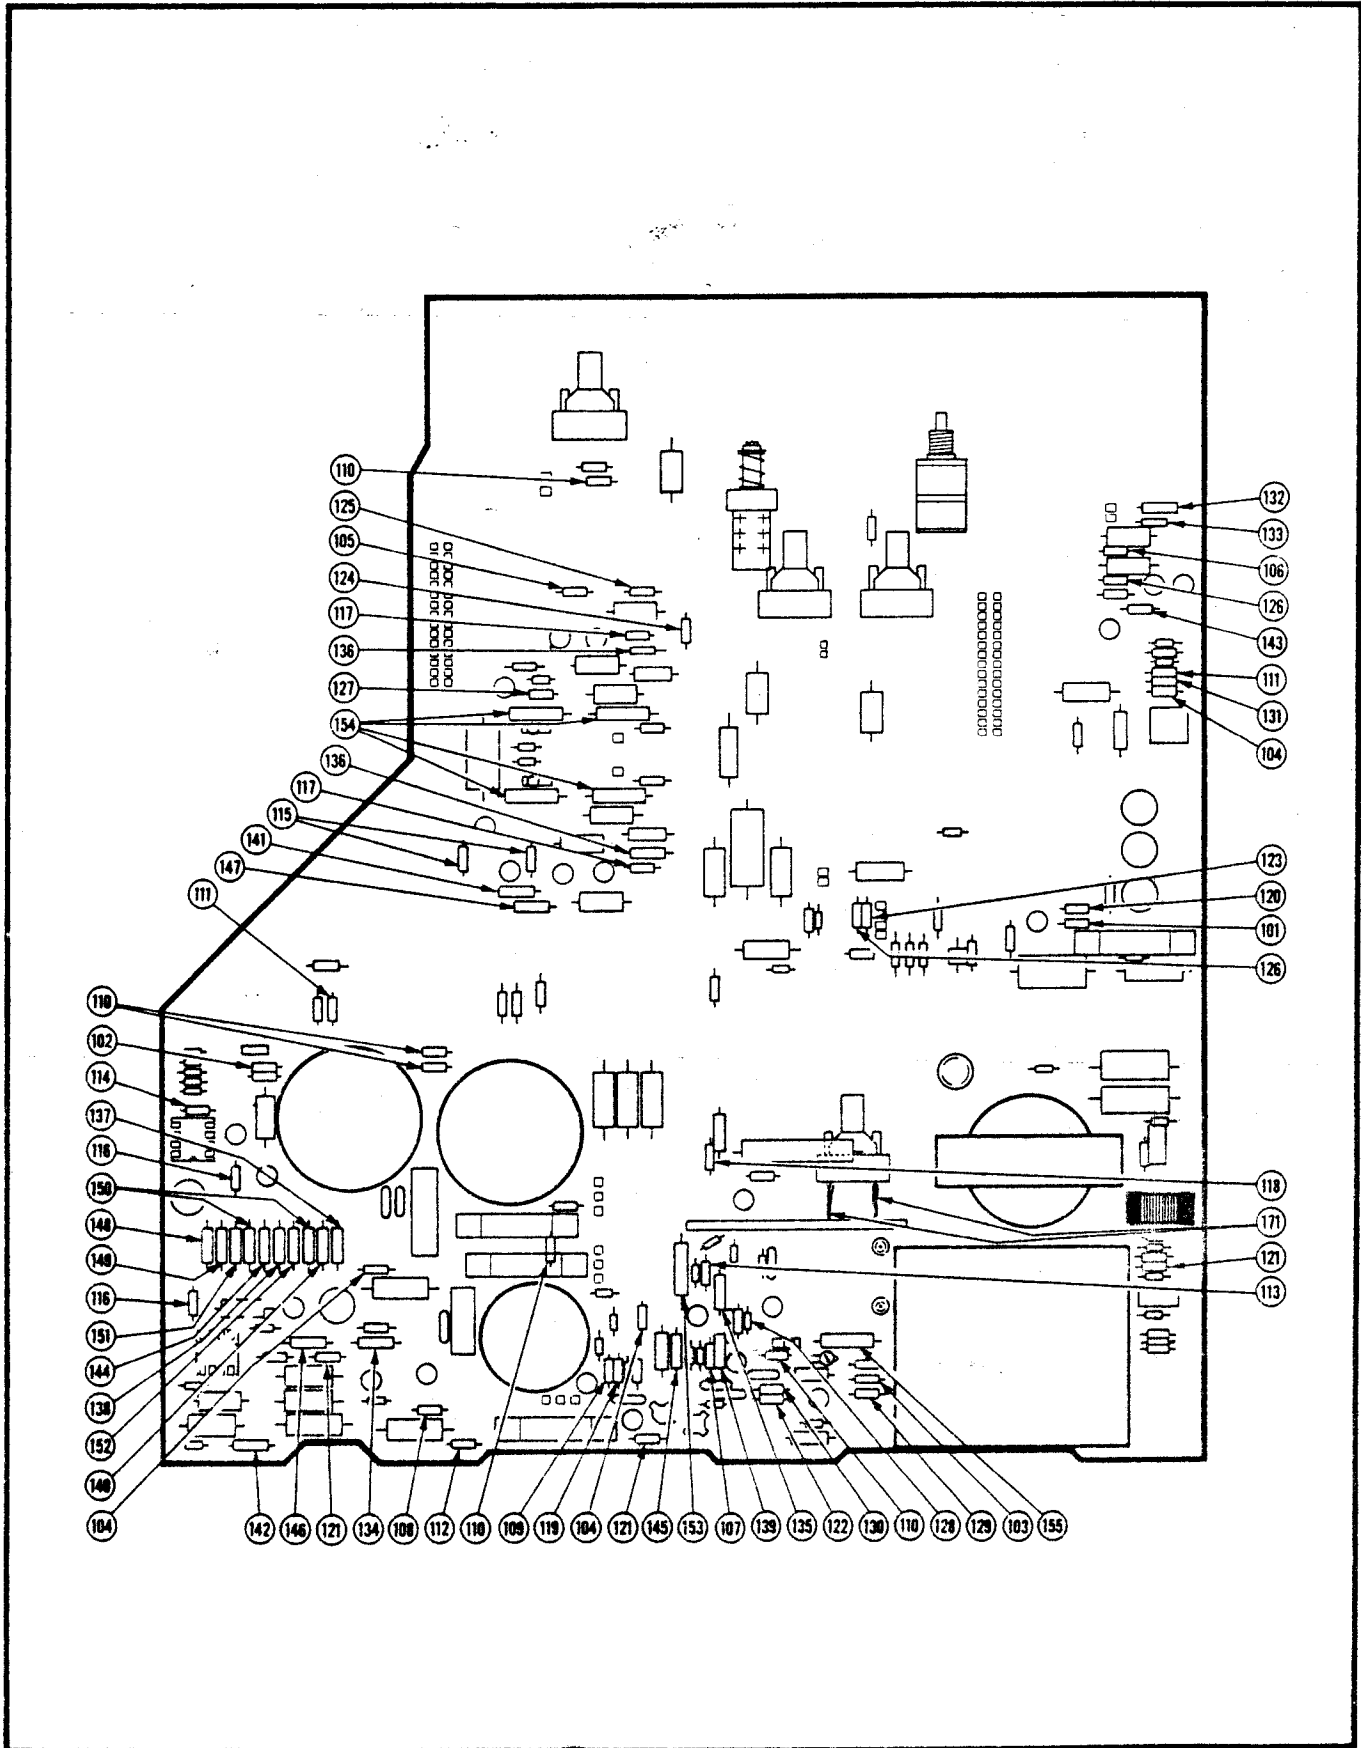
A11 Circuit Board Assembly, Interface (sheet 3 of 4).
